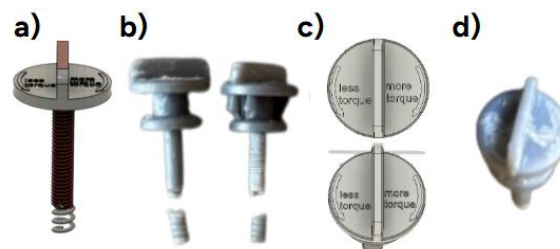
Comparison between the intended 3D designs and the printed prototypes. (a) Autodesk Fusion model of the integrated screw–spring mechanism. (b) printed mechanism, whose springs were fractured. (c) Autodesk Fusion model of the top of the screw showing the “less torque / more torque” legend. (d) printed component, in which the text failed because its feature size fell below the printer’s resolution.
